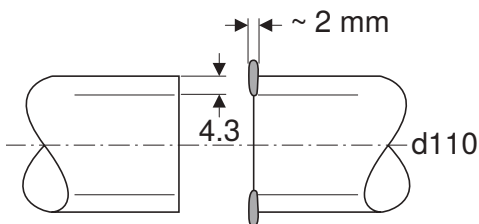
Example of the thickness of the welding bead with a wall thickness = 4.3 mm
